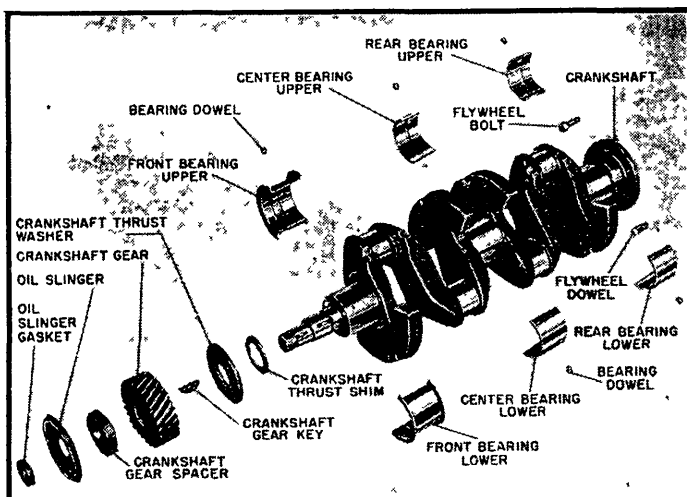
Lay out of crankshaft gear, crankshaft and main bearings in 1951-52 four-cylinder engine. Six is similar
